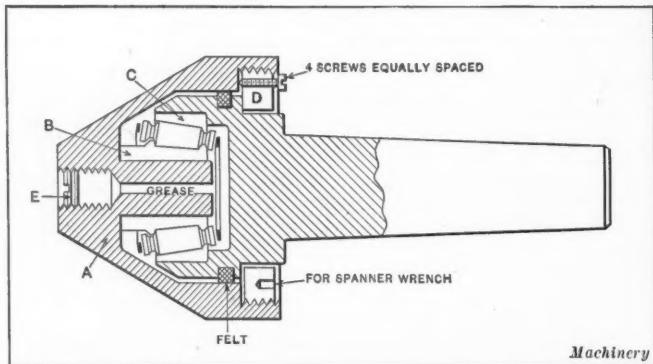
Roller-bearing Lathe Center designed to carry Thrust exerted by Cutting Tool when Heavy Cuts are taken
